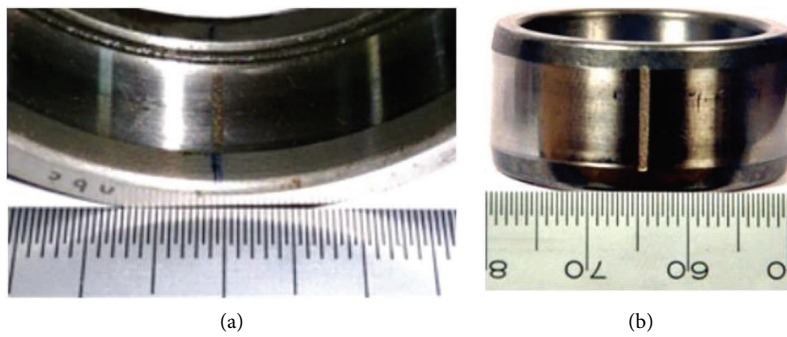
Rolling element bearing test rig. (a) Outer ring defect. (b) Inner ring defect.
